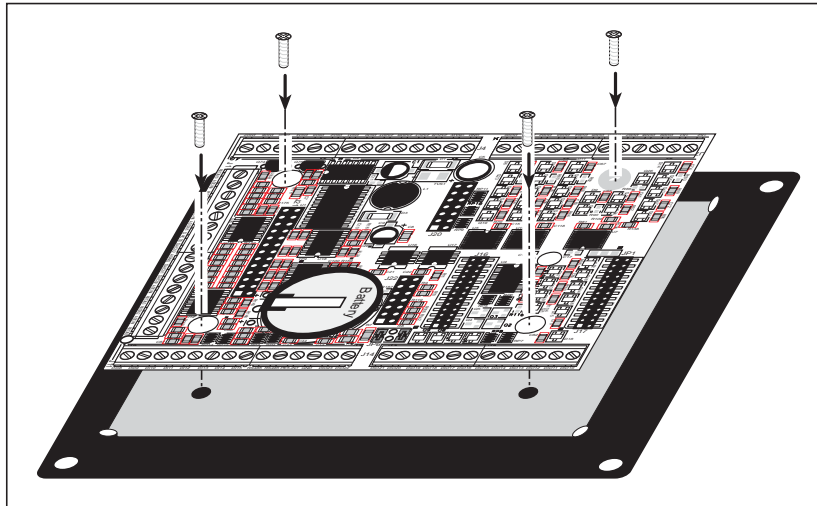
Attach BL2100 Main Board to Plastic Enclosure Base
